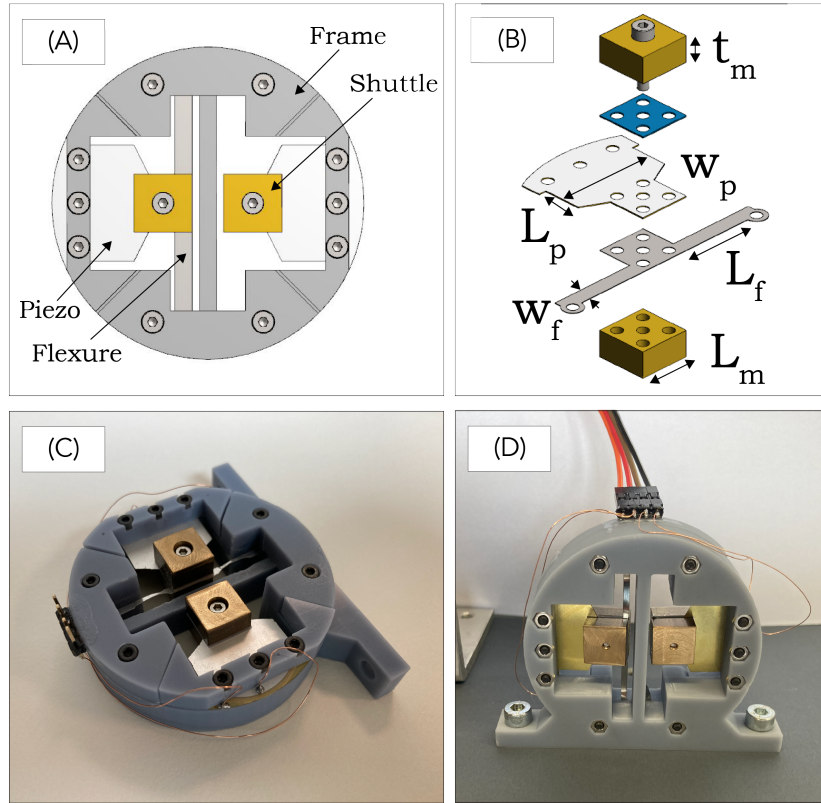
A) Mechanical design and components; B) Assembly and relevant parameters of the vibration energy harvesters; C/D) Assembled prototype.
